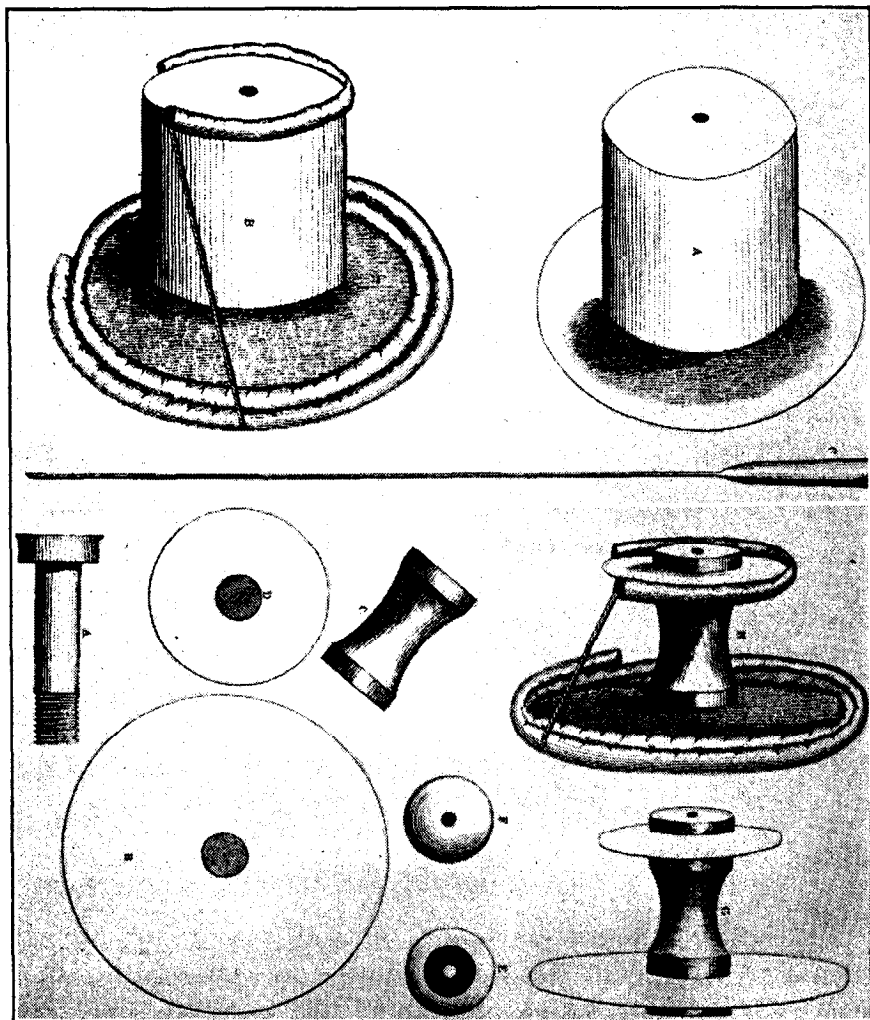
Pinwheels, Tessier, 1883. Wheels which show an inner circle of colored fire. Plate 1 (above) pictures pinwheels which are intended to be sold as completely consumable. The instrument represented at the bottom of the plate is the ramrod for tamping the charges in the pipes. Plate 2 (below) represents pinwheels which are intended to be exhibited by the pyrotechnist himself: the wooden parts are to be recovered and used again.
